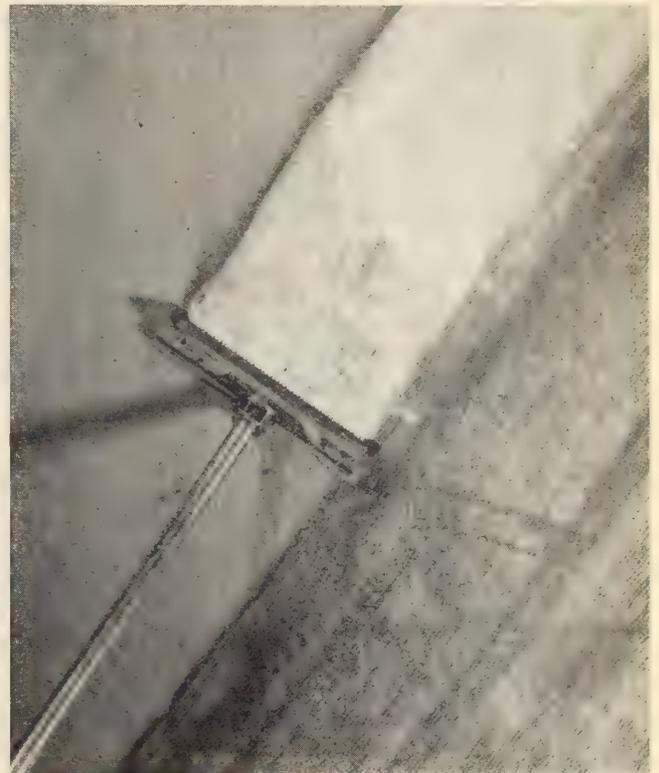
Showing the flame-priming head which is attached to the standard welding blow pipe. The dark streaks that appear on the plate surface are black magnetite and the silvery streaks between them are sponge iron.
